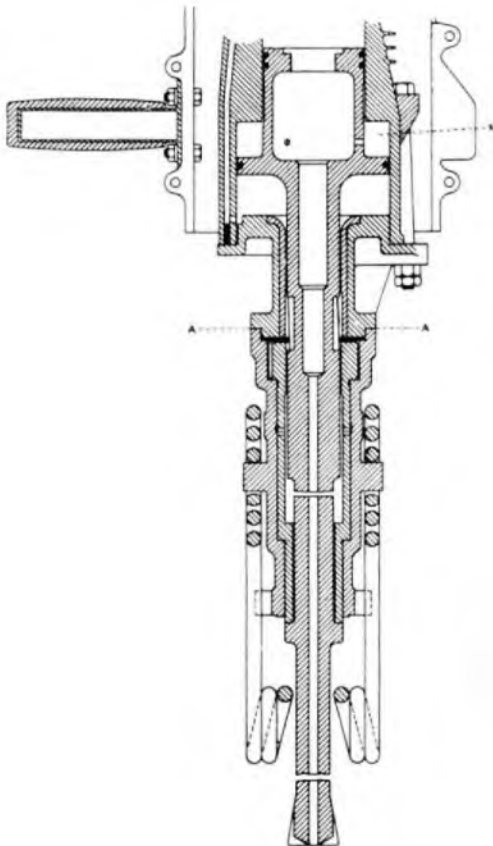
SECTIONAL VIEW OF ROTATIONAL MECHANISM.
